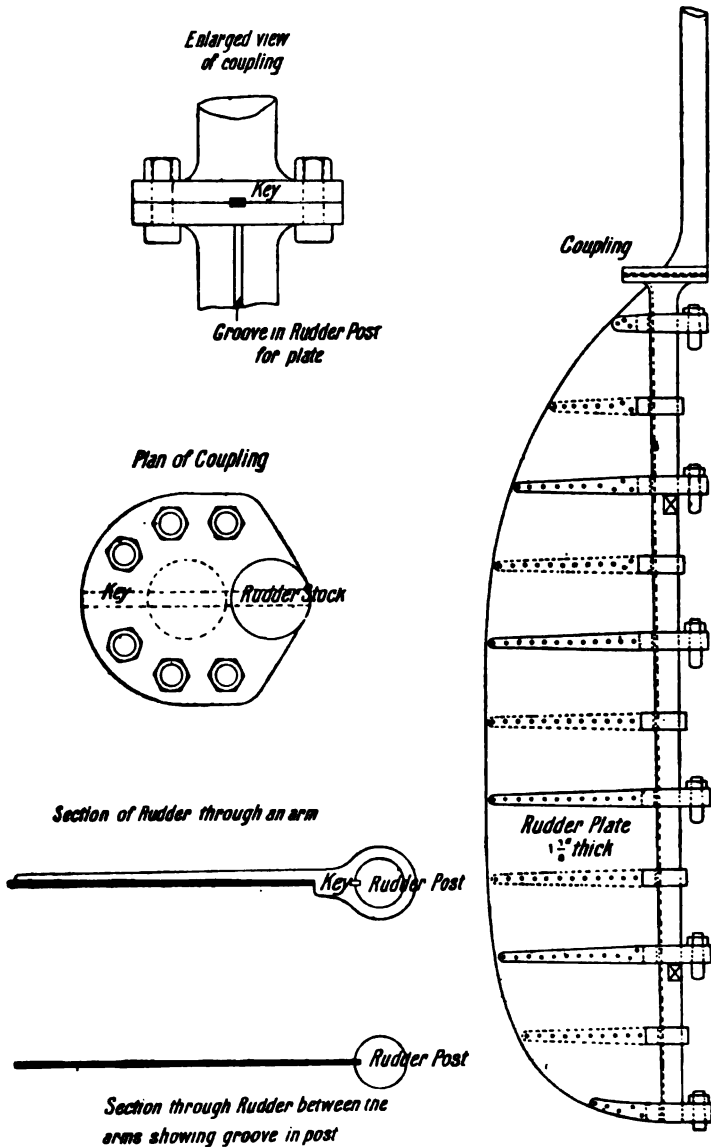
Plate Rudder, showing Arms shrunk on and keyed.
